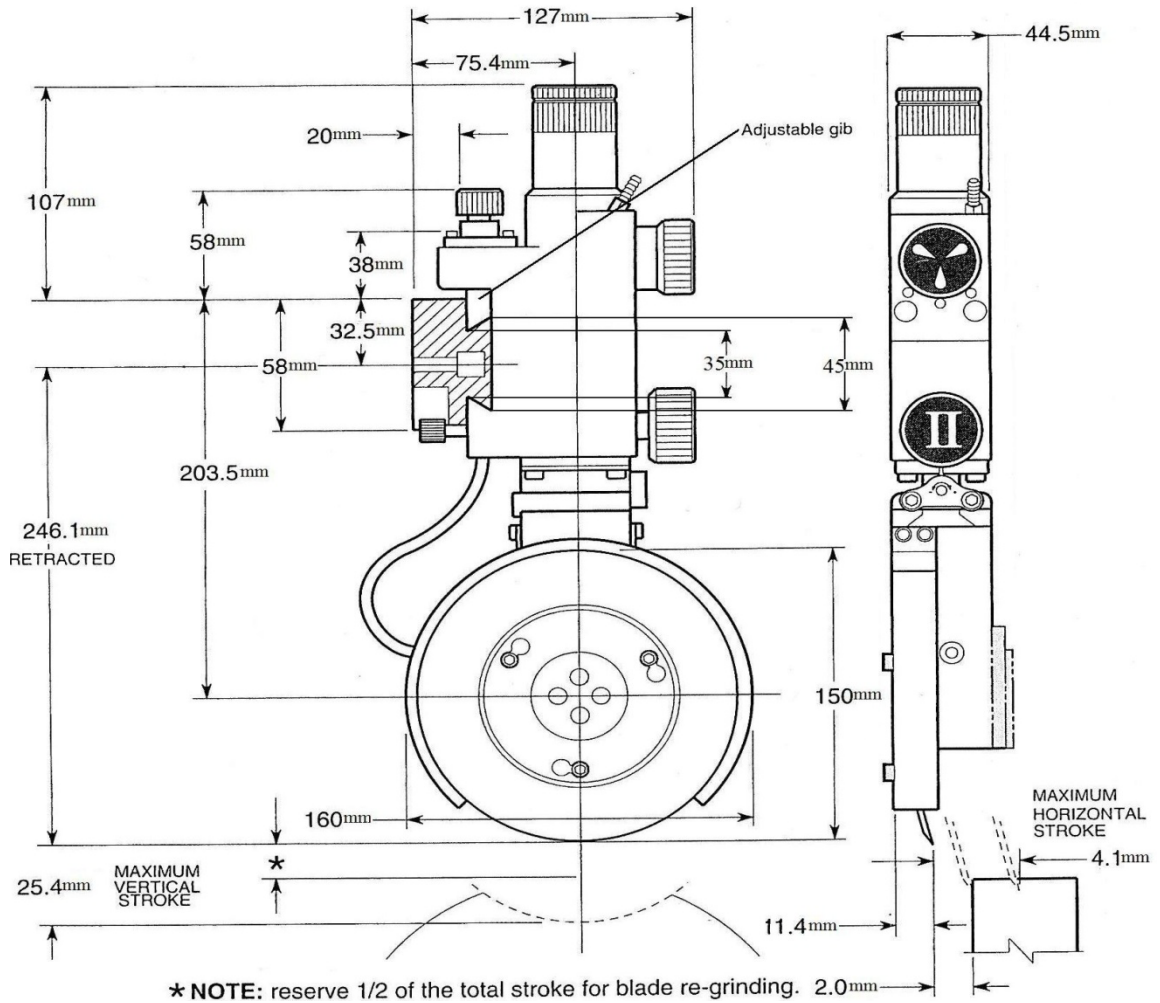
Schematic drawing of male slitter blade assembly [3]
